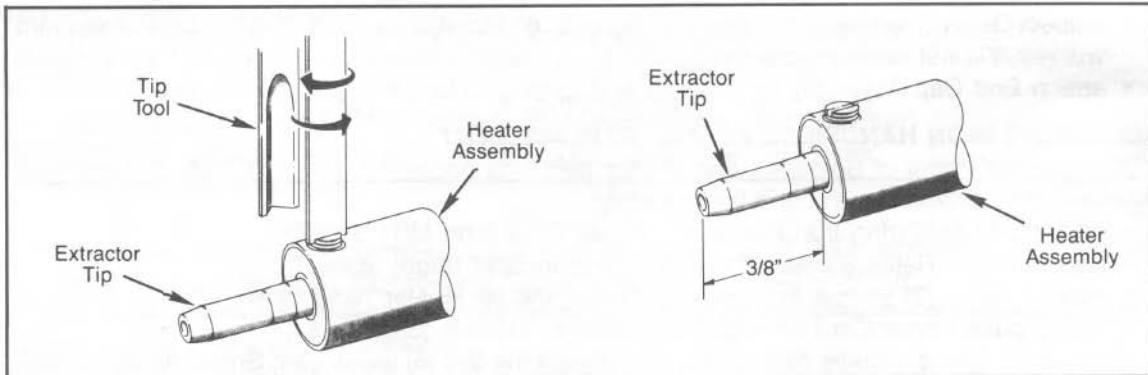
EXTRACTOR/SOLDERING IRON TIP REPLACEMENT
